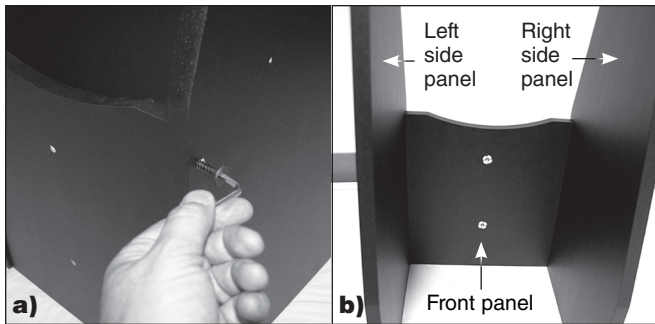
a) Attach the two side panels to the front panel with the base assembly screws and included Allen wrench. b) The side panel with the two holes for the eyepiece rack should go on the left side.
